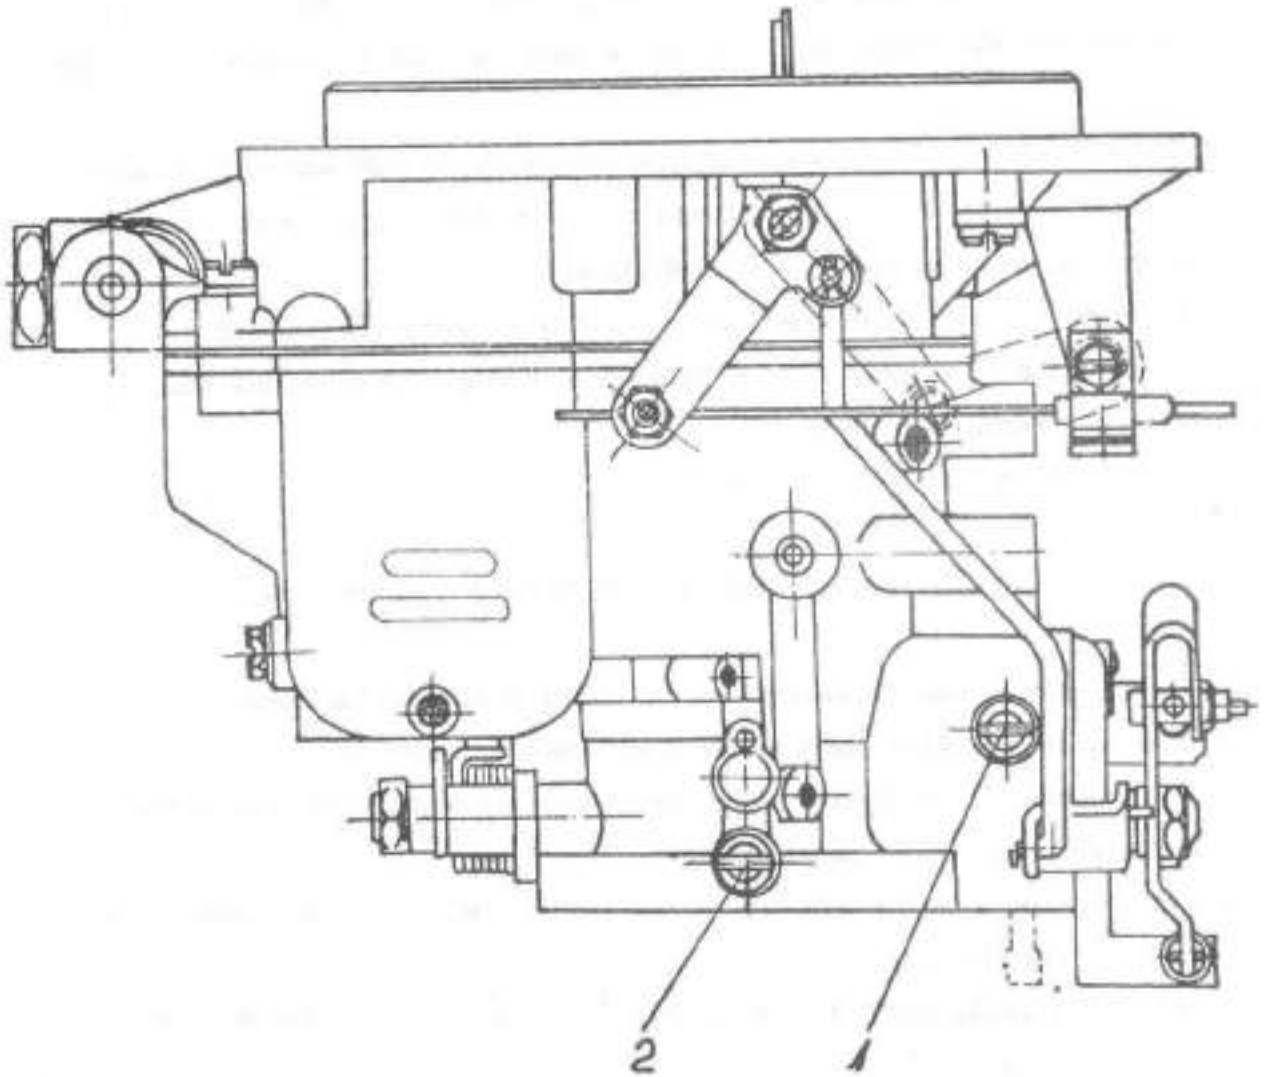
LOCATION ON CARBURETTOR OF IDLE SPEED ADJUSTING SCREWS.
